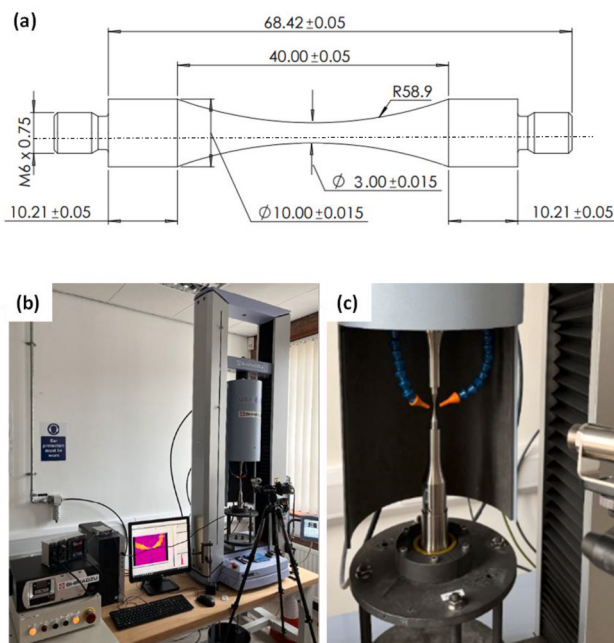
Engineering drawing of the double-threaded hourglass specimen (a); general view of the experimental setup (b) and close-up view of the specimen (c).
